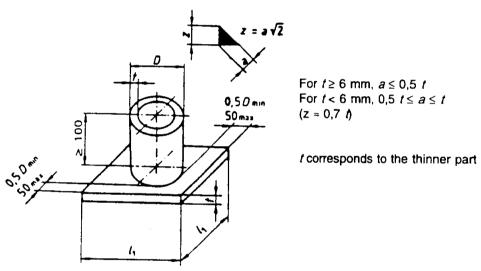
Dimensions of test piece for a fillet weld on pipe
